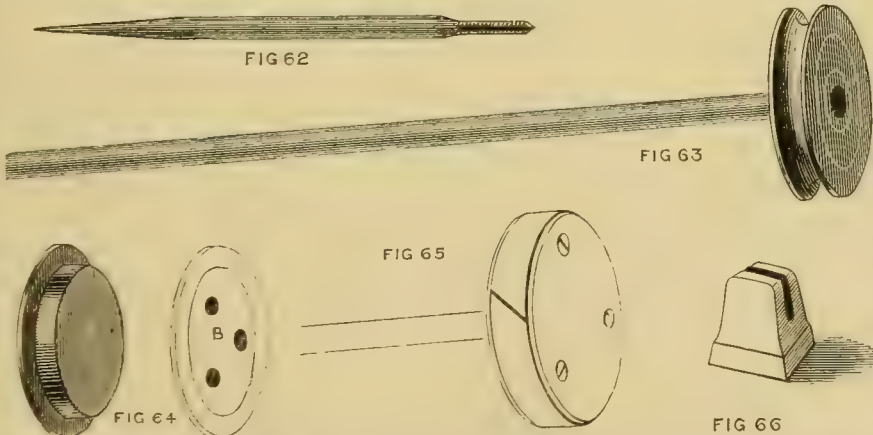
STEEL FOR PLUG TAP. FIG. 63.—PISTON AND PISTON-ROD WHEN FINISHED. FIG. 64.—PISTON IN TWO PARTS, (A) TOP PLATE, AND (B) BOTTOM PLATE. FIG. 65.—PISTON WHEN COMPLETE. FIG. 66.—VALVE SHOWING FILED SLIT IN BACK.
